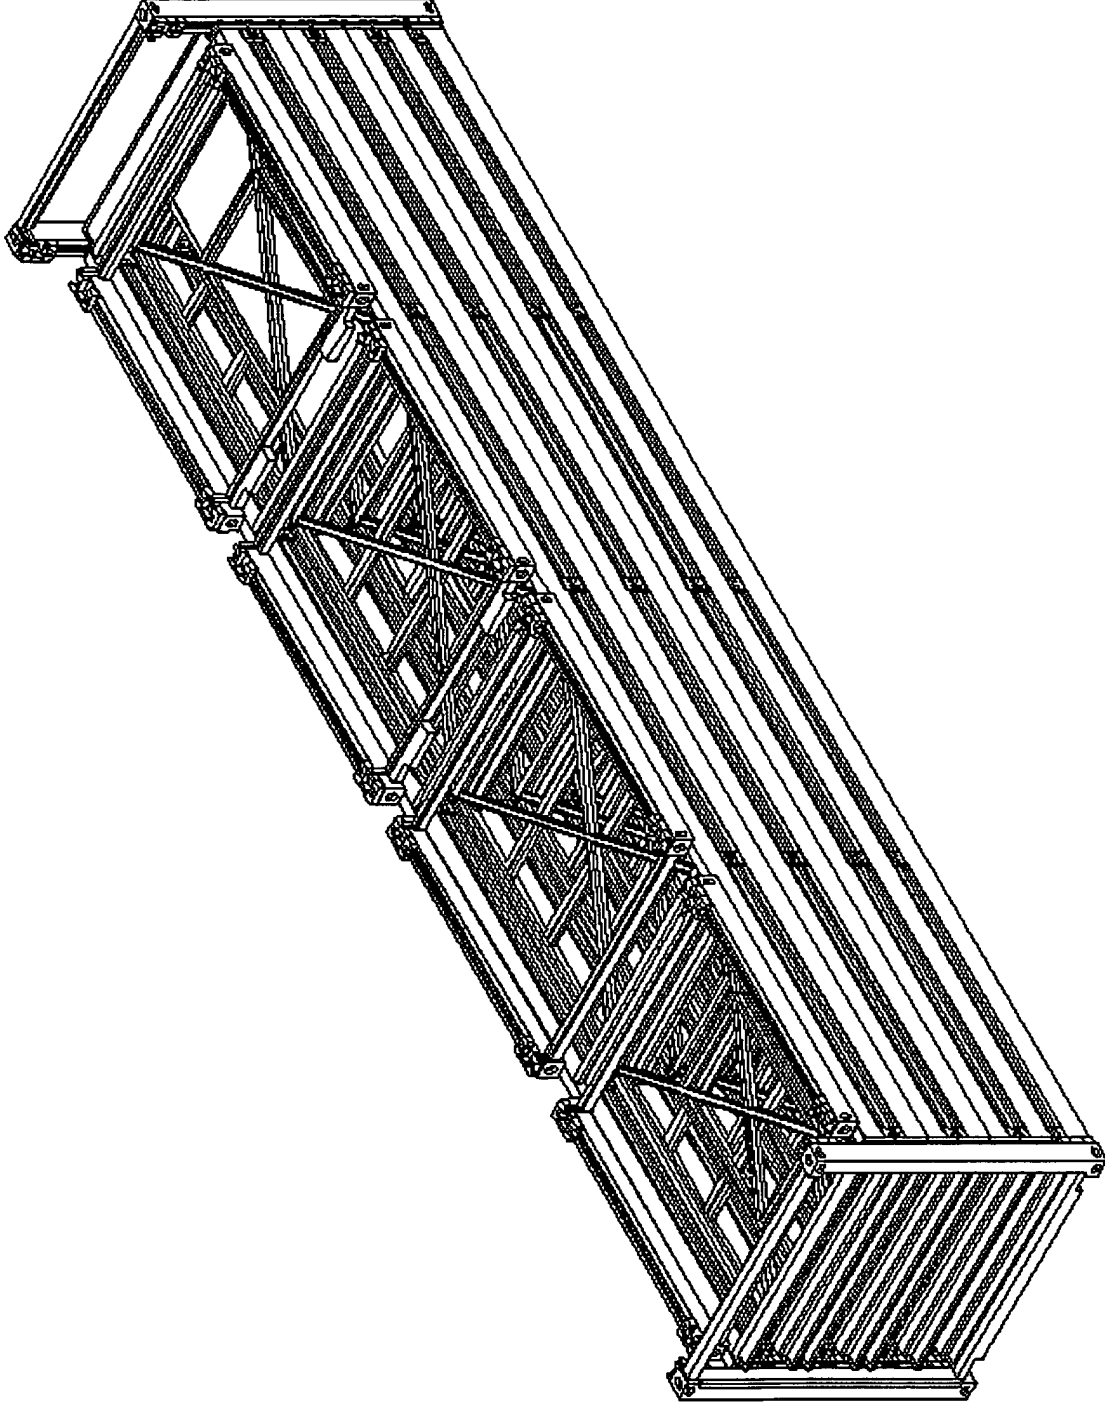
A: Step7 of disassemble and load process: The right frame of the shipping collapsible cargo container is assembled.
